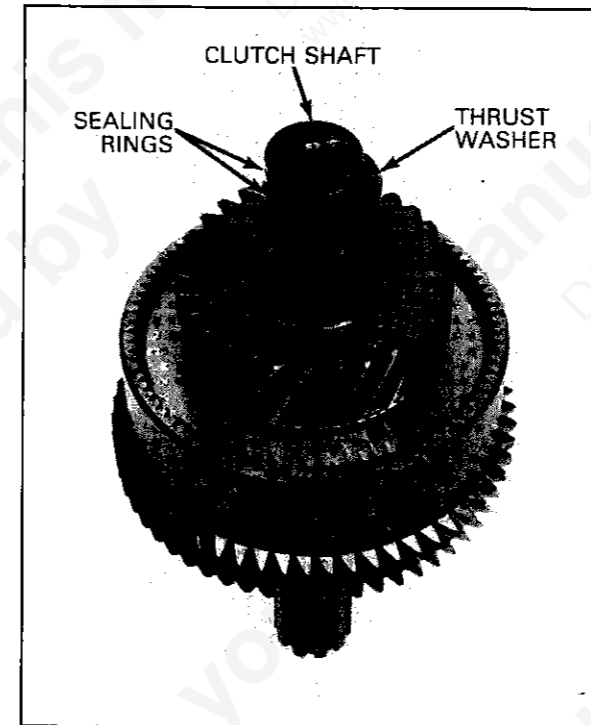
CLUTCH SHAFT SEALING RING INSTALLATION
